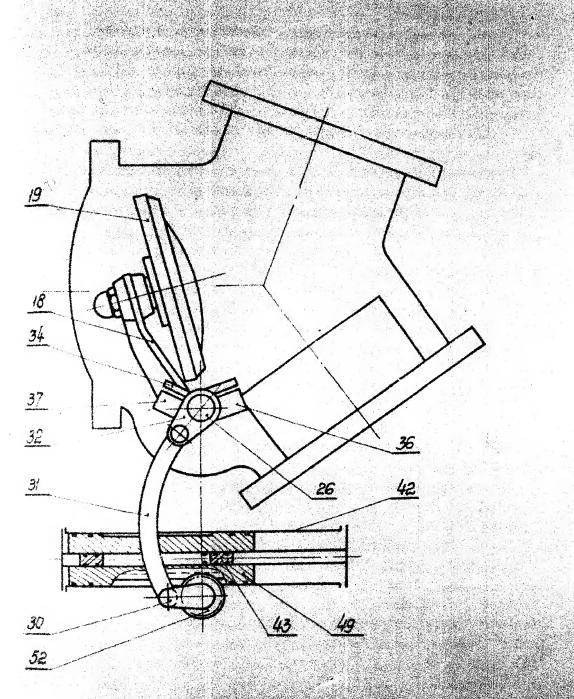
, CONTROL GEARING MECHANISM OF INNER FLAP
